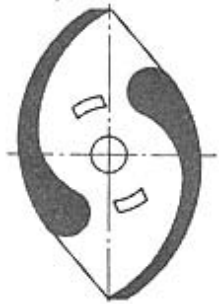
Open two-passage non-clogging impeller with S-shaped blades
